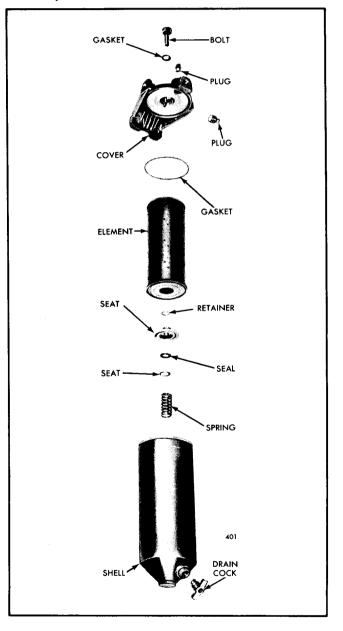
Fuel Filter Details and Relative Location of Parts
